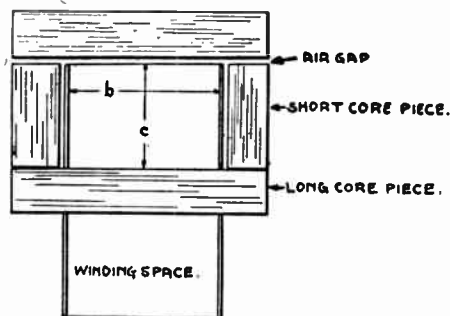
CORE ARRANGEMENT FOR FILTER CHOKE COILS
